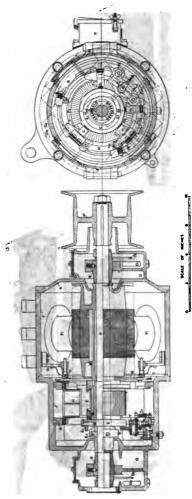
Sections Showing all Parts of a Series 6 Machine. Leitner Generator
